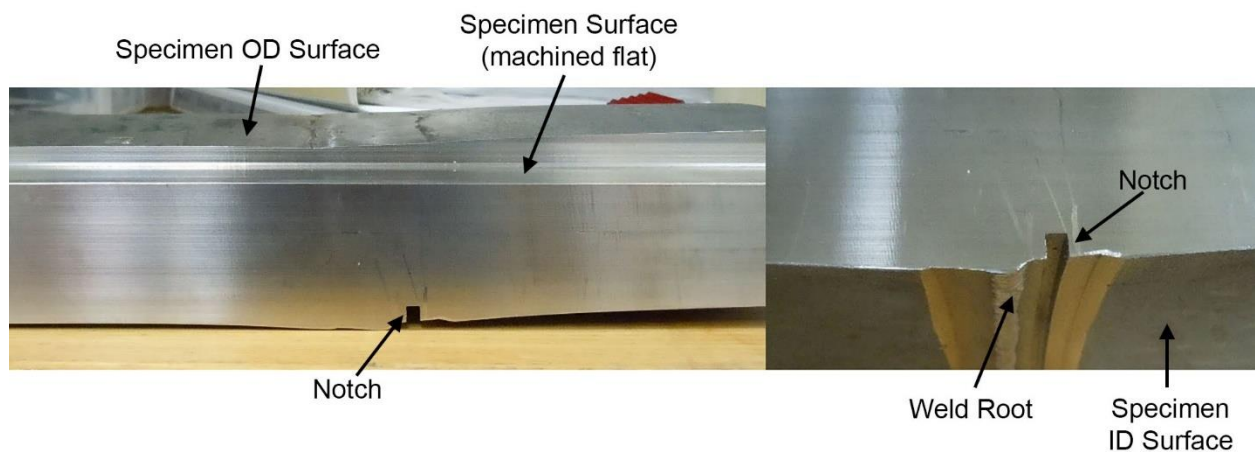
Photograph of Specimen 2 with a saw-cut notch. *Left:* Side view of the specimen showing the machined flat top face. *Right:* Bottom of the specimen, showing the weld root and counterbore.
